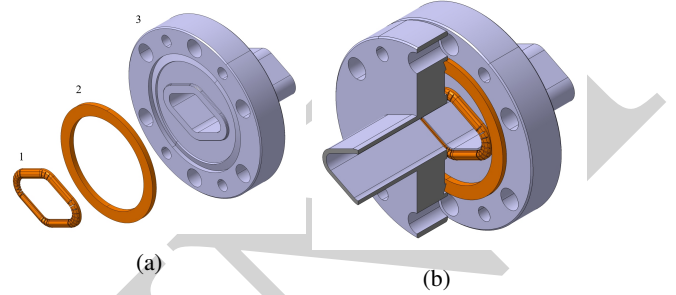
Impedance mitigation through RF gasket: (a) flange assembly before mounting, RF contact gasket (1), CF vacuum gasket (2), flange (3) and (b) fully assembled.
